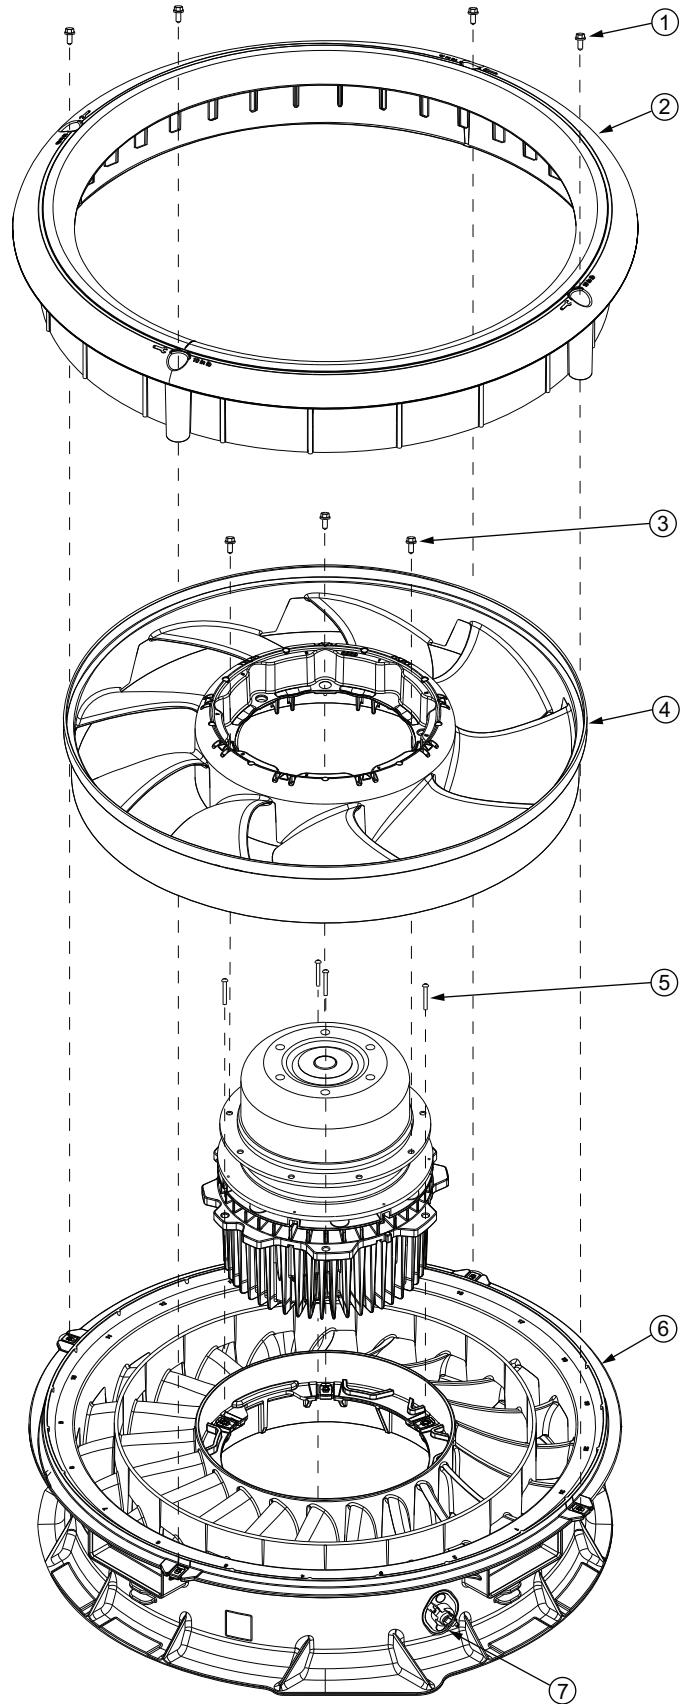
Fan Assembly for Units with 3.0 Hp Motor
